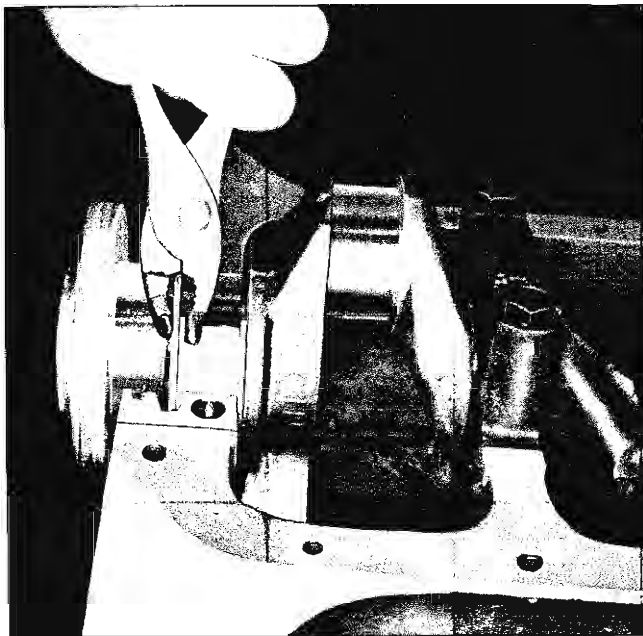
Rear Main Bearing Removal (Upper Shell)
